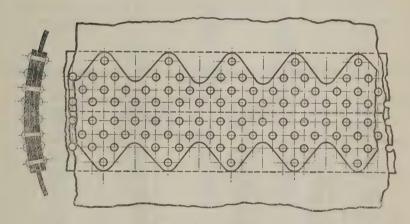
Illustration of Butt and Double Strap Joint of the Saw-Tooth
